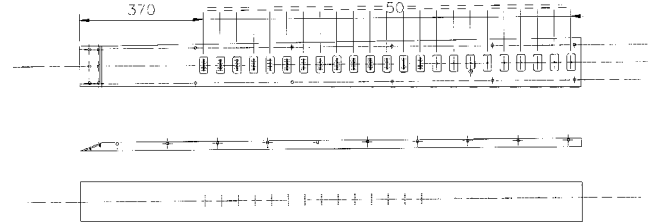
Test plate showing locations available for heat-transfer gauges (dimensions in millimeters).
